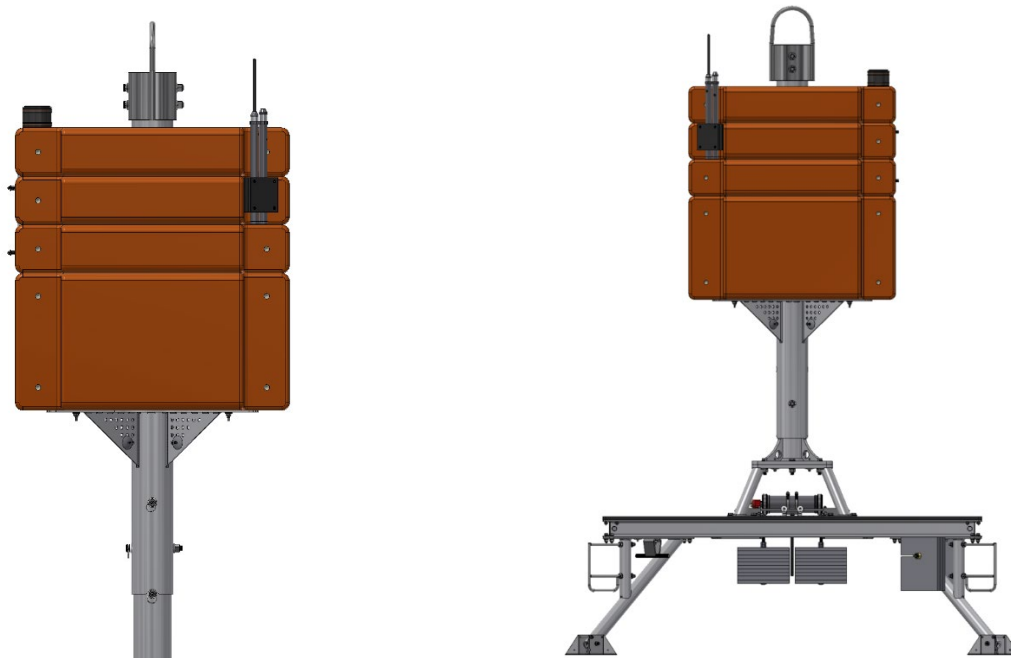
Elevator mast pins (left) & elevator in stowed configuration (right).
